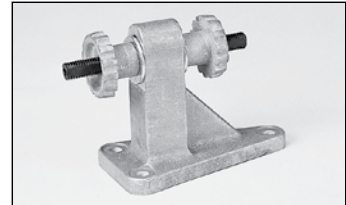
Mandrel Rod Stop Assembly 412/424
